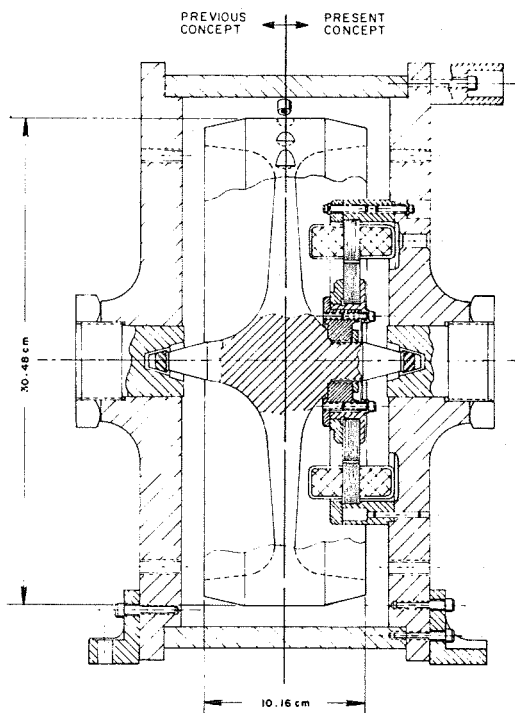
Component Parts of the High Angular Momentum Wheel Showing Conversion from Air Turbine to Electric Motor Drive
